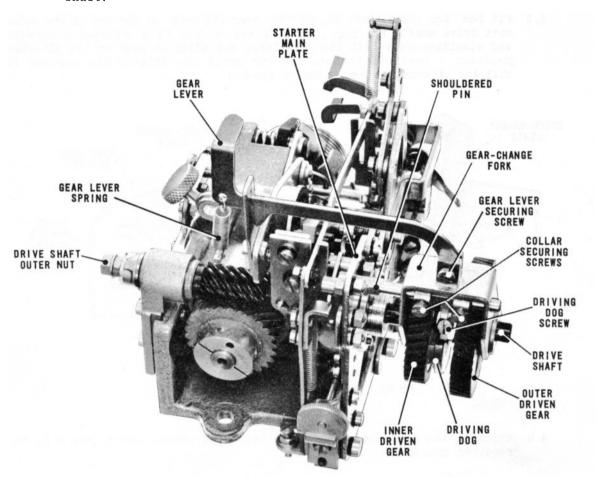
SELECTOR UNIT FITTED WITH A GEAR-BOX
